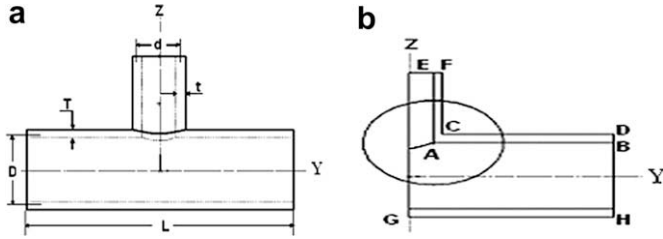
Geometric details of a tee intersection, without wall thinning: (a) full geometry, (b) half-section through YZ plane.
